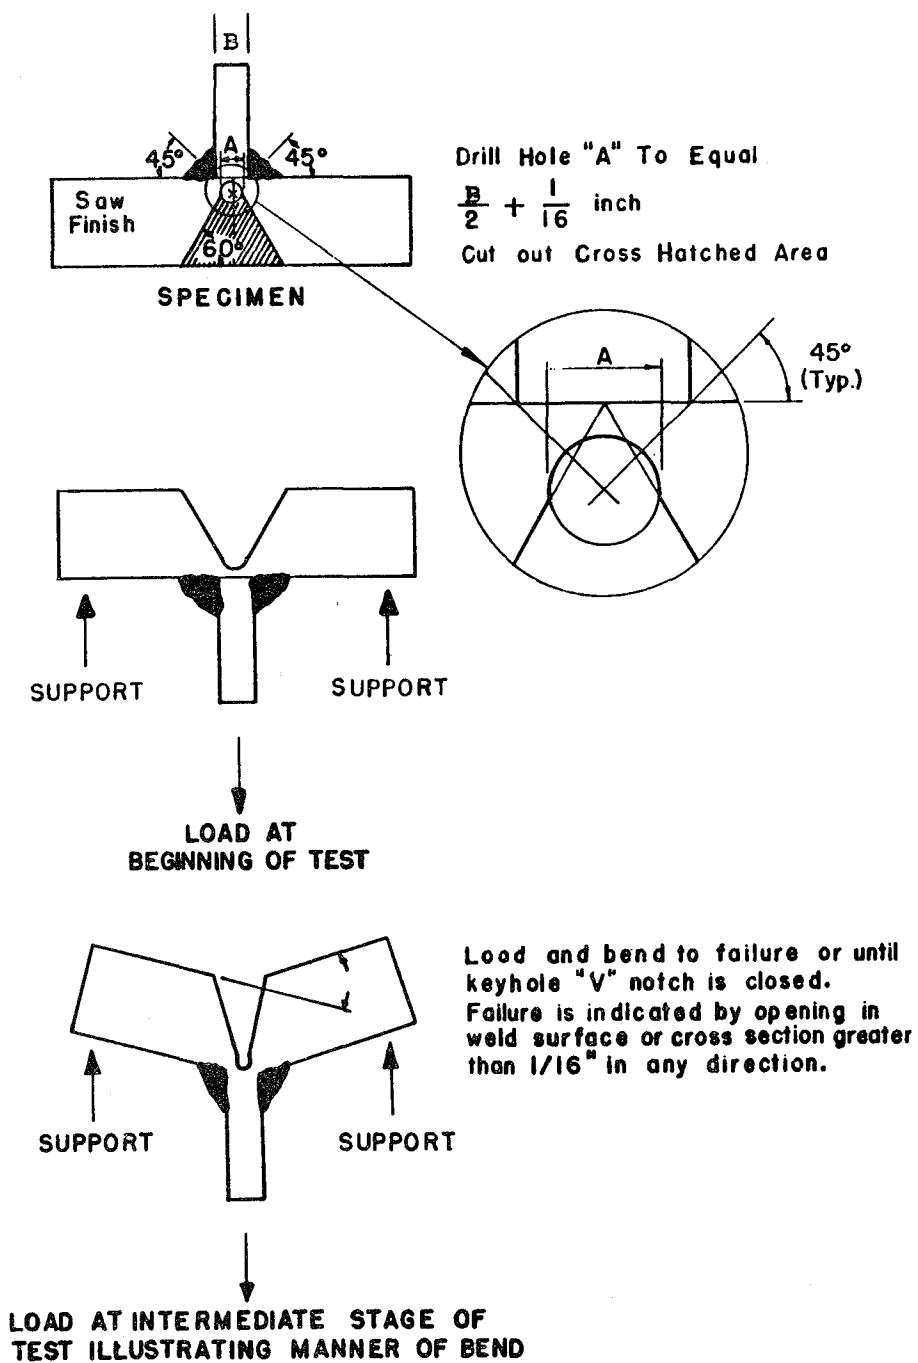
FILLET WELD KEYHOLE "T" BEND TEST
